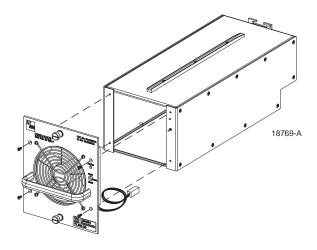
LPA Fan/Front Panel Assembly Removal
